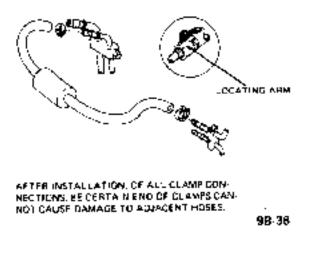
Hose and Clamp Installation • Opel 1900 Manta
